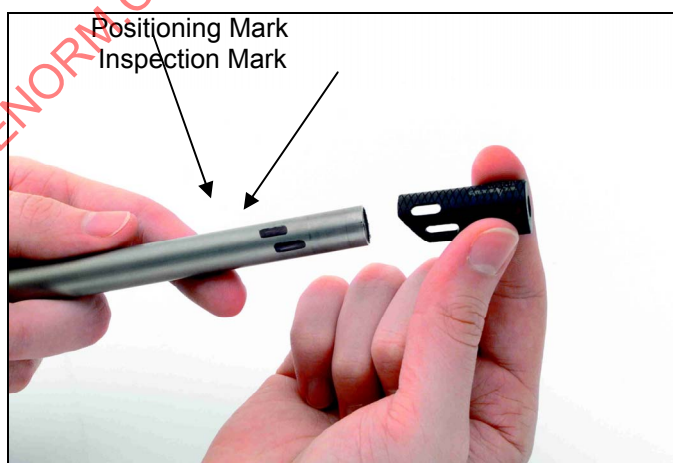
B - TUBE INSPECTION MARKS AFTER REMOVING MARKING GAGE
